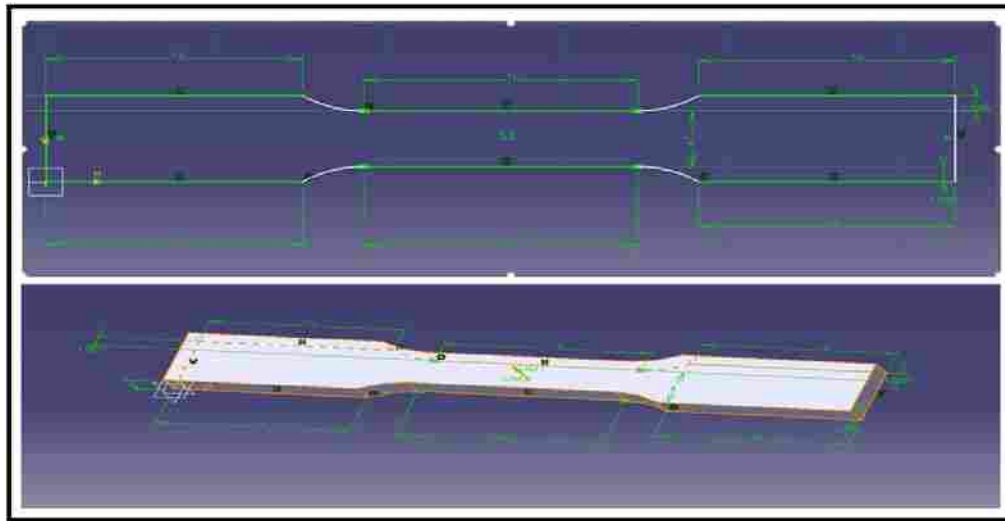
Dogbone Dimensions Used for Tensile Testing (mm)
